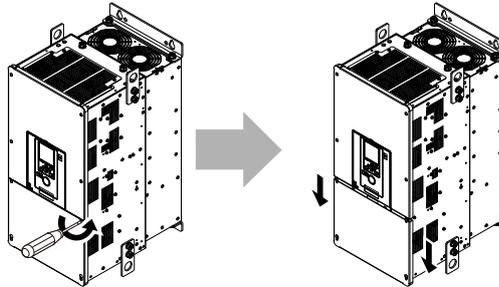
Loosen the Terminal Cover Mounting Screws
